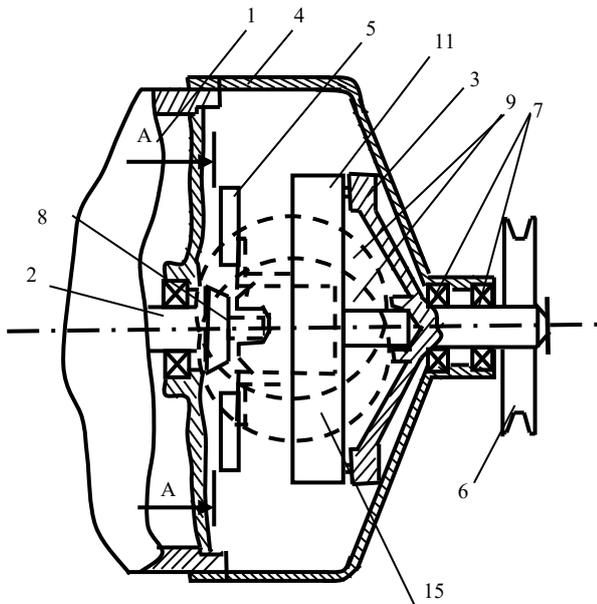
The design diagram of the drive device for hybrid electrical drive, 1) DC motor; 2) drive shaft; 3) driven shaft; 4) cover; 5) brake disc; 6) pulley; 7) bearings; 8) small gear hypoid gear; 9) large gear hypoid gear; 10) gear helical gear; 11) screw wheel
